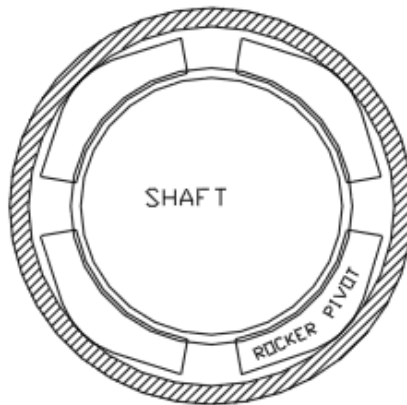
Rocker-Pivot Tilting-Pad Journal Bearing [1]
